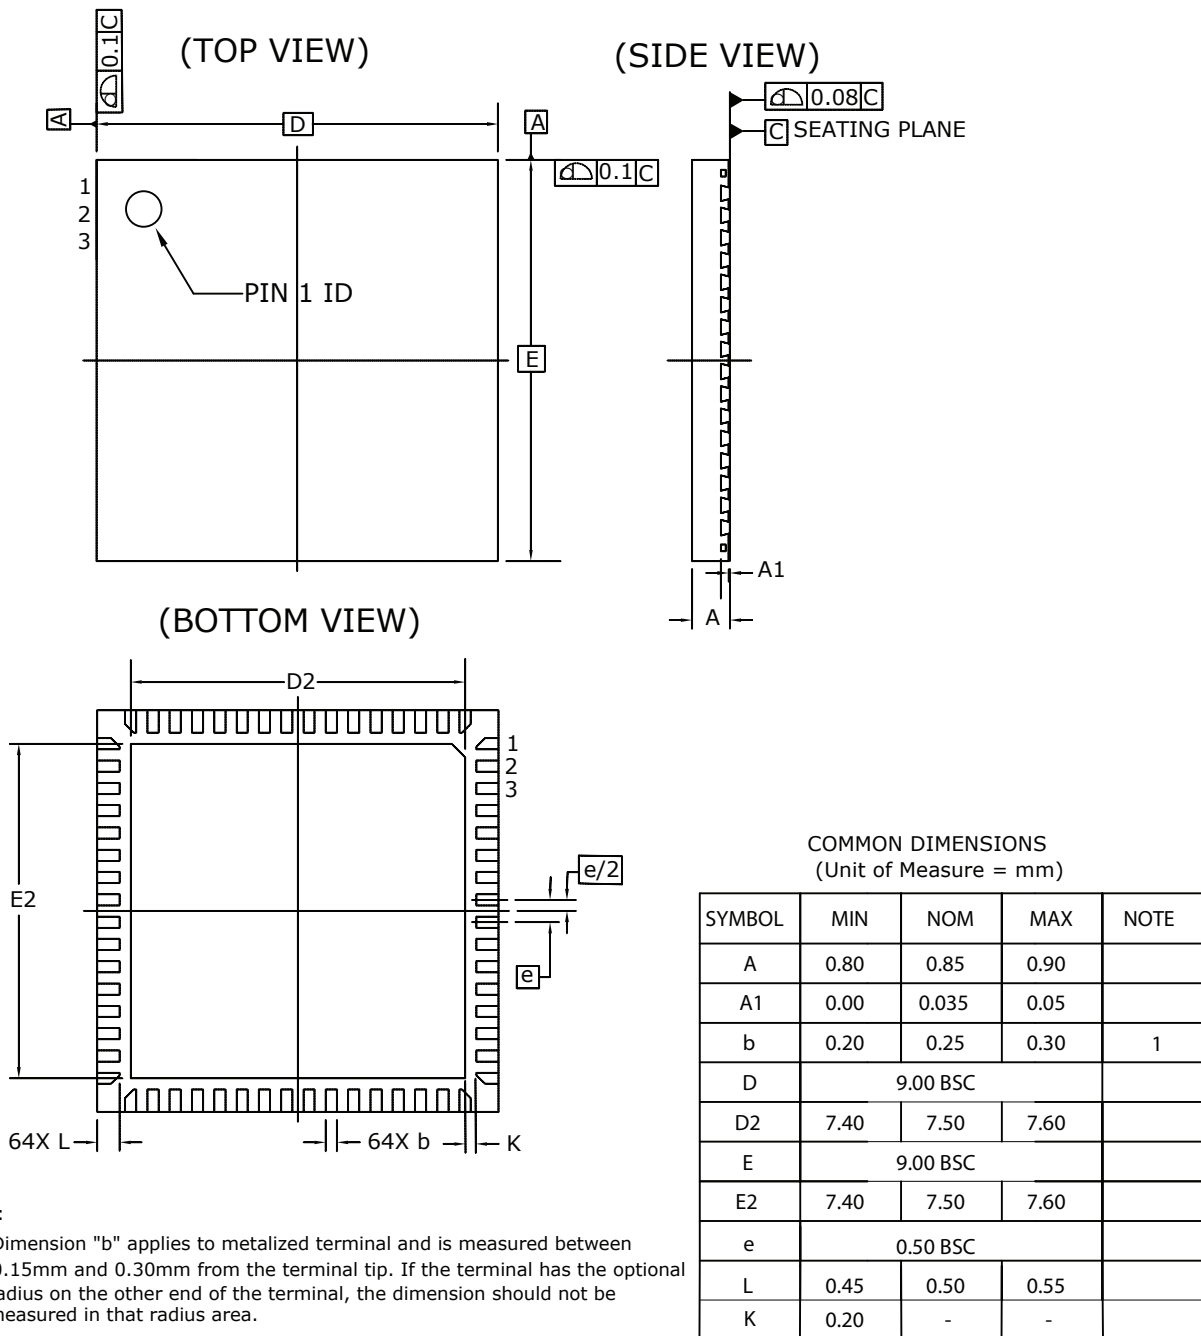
Package Dimensions: 64-pin, 9mm x 9mm x 0.85mm TQFN (0.5mm pin pitch) with Exposed Pad.
